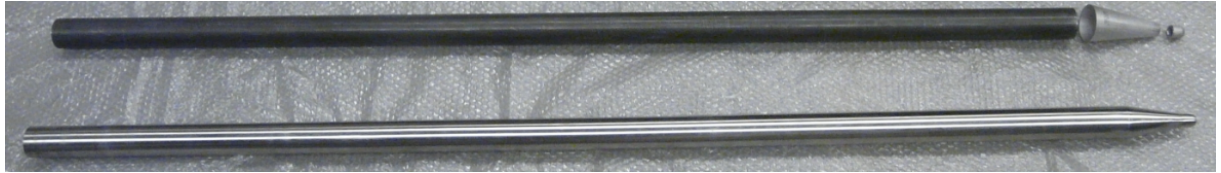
Parts needed to built the stainless steel tube and the tube after being sanded.
